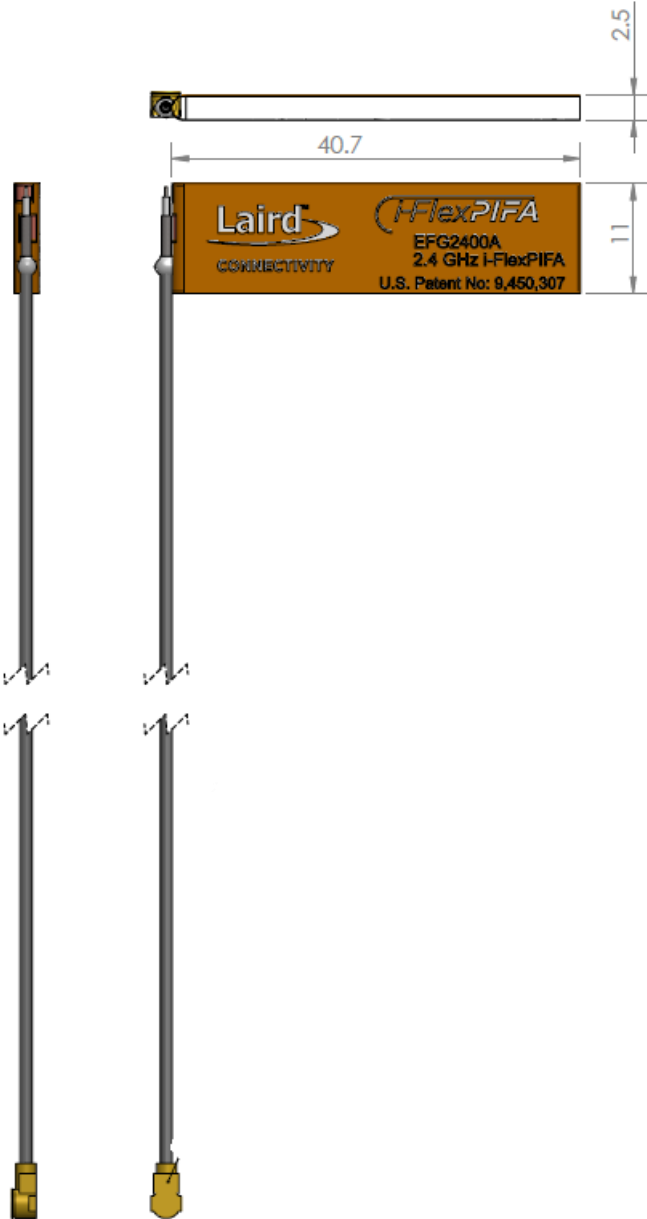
i-FlexPIFA mechanical drawing of EFG2400A Antenna
